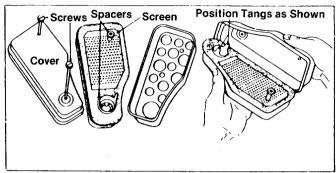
CHAIN ADJUSTMENT AIR CLEANER
